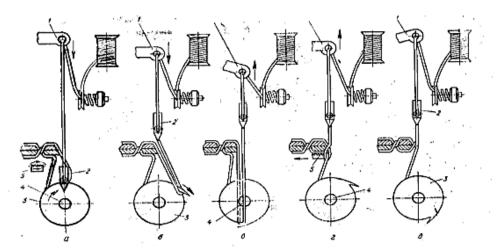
shows the position of the upper thread puller while forming a two-strand shuttle stitch.
